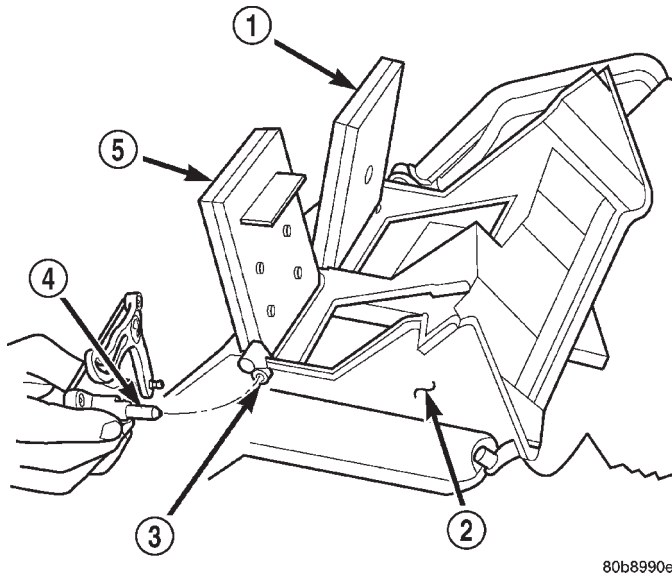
BLEND DOOR SUB-ASSEMBLY (AZC)
